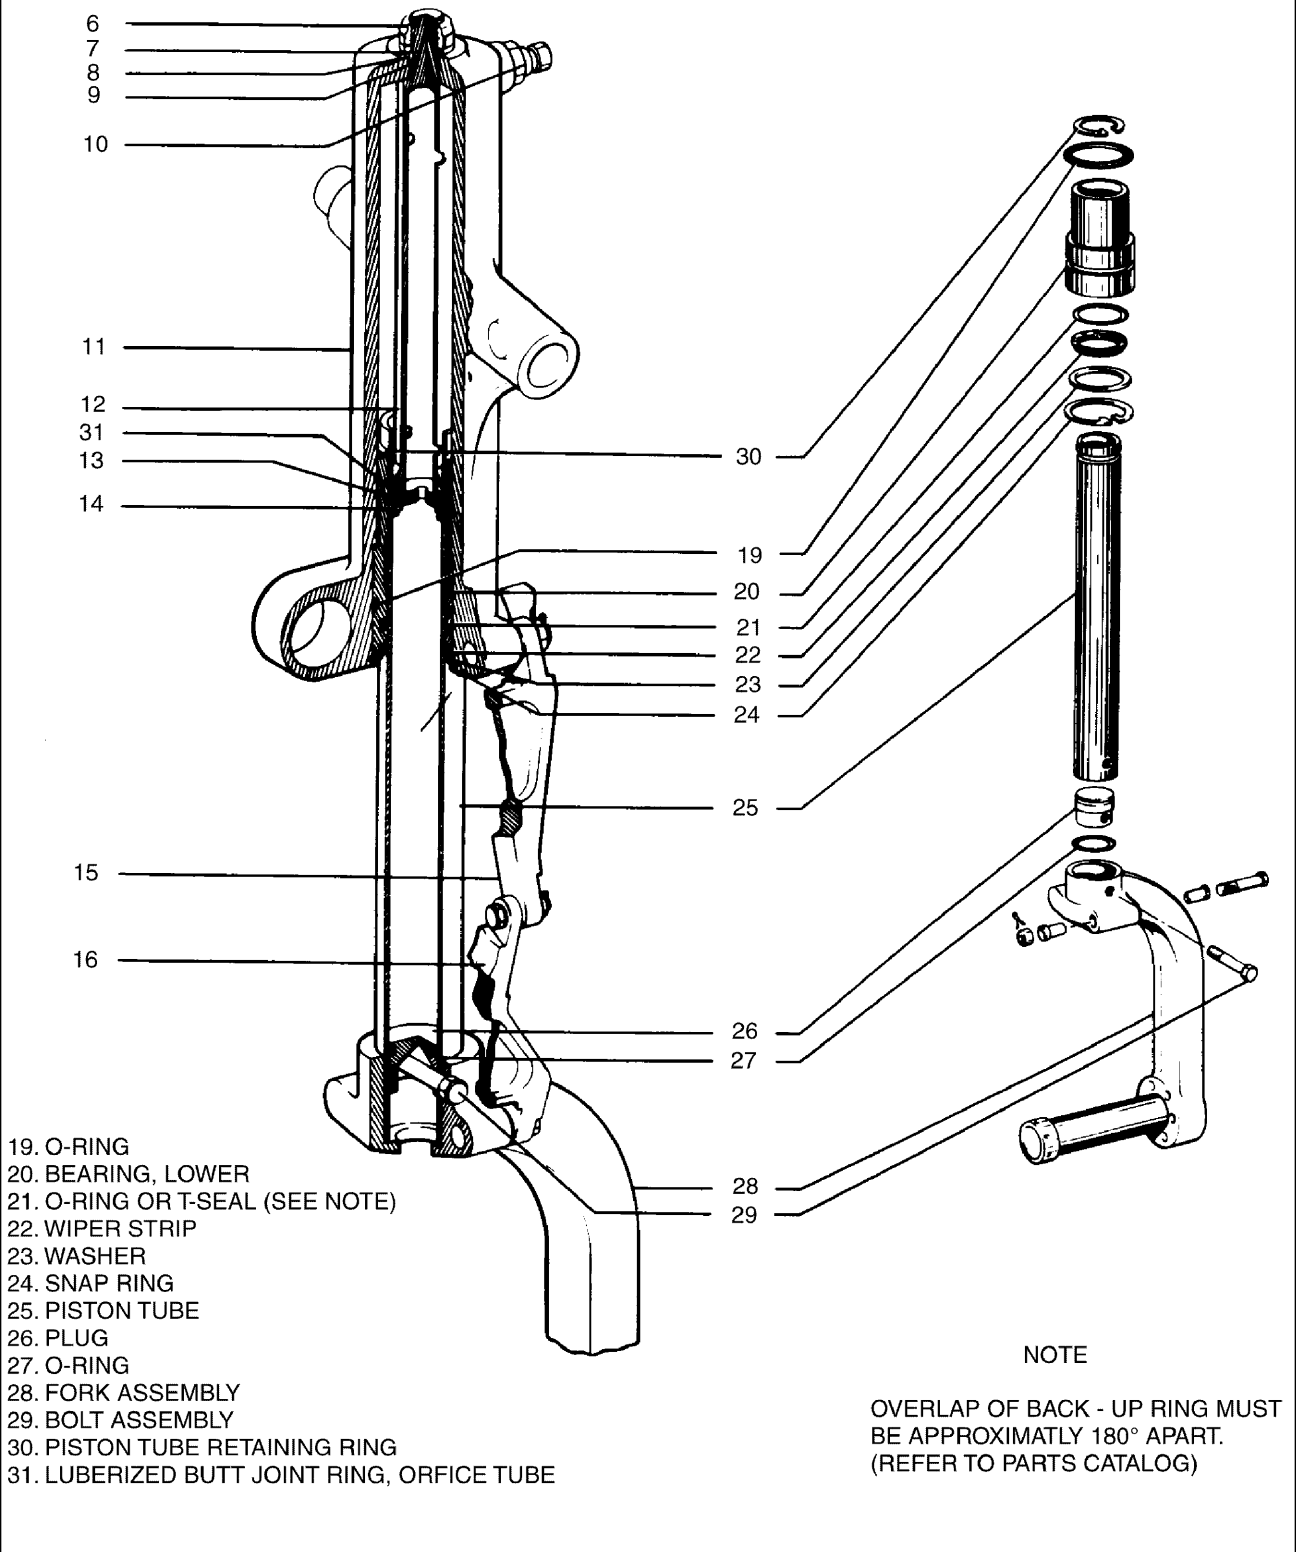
Main Gear Oleo Strut Assembly (Sheet 2 of 2)
